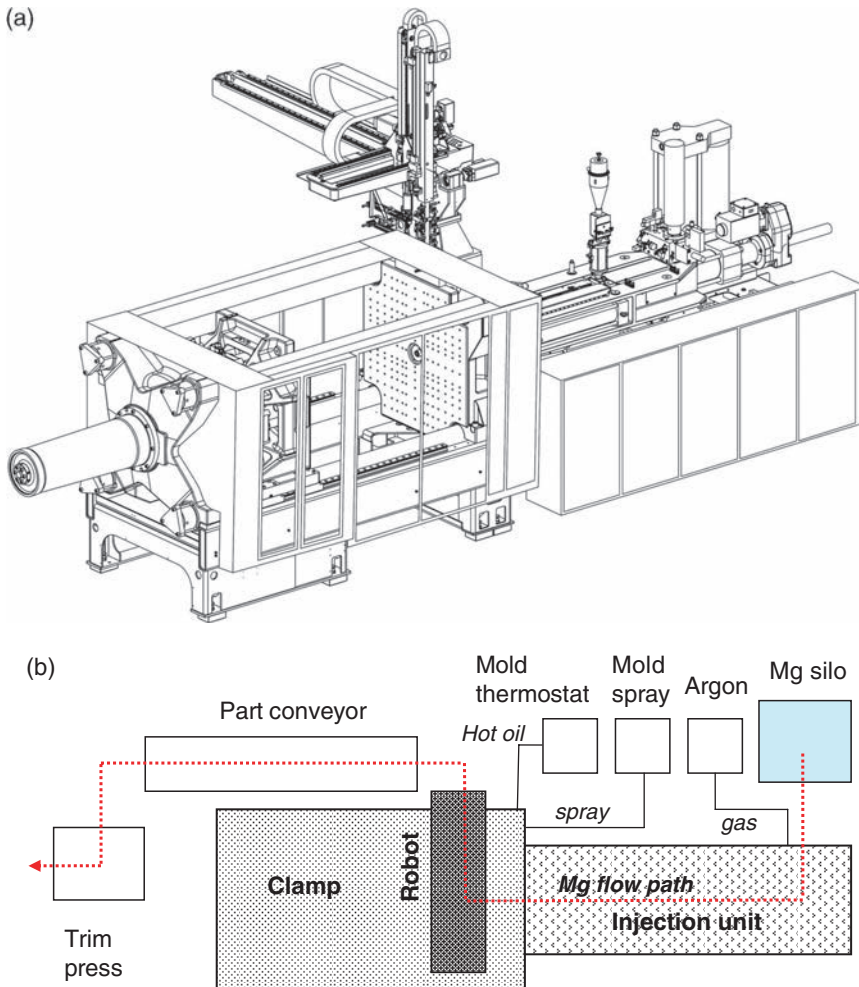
The schematics of an injection molding machine with its basic parts of clamp (left side) and injection unit (right side) and top-entry robot a. A location of the machine within the integrated cell is shown in b
